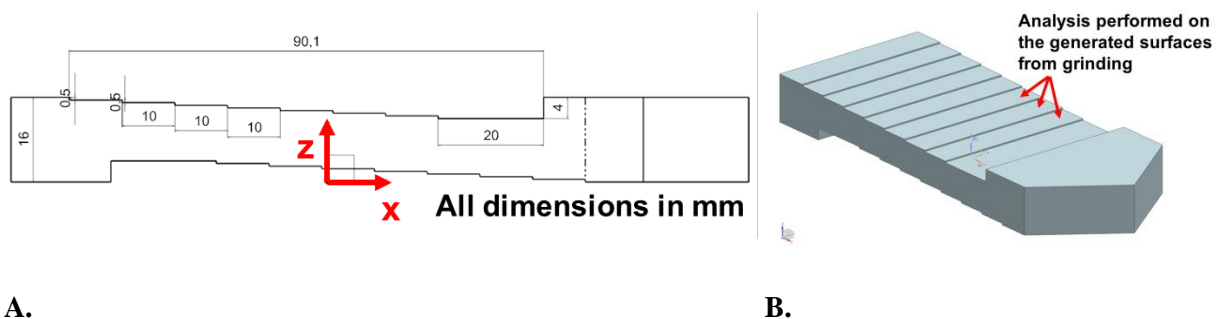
(A) CROSS SECTION OF CD GRINDING PLAN ON CMSX-4 SLABS (B) 3D ISOMETRIC VIEW OF COMPONENT AFTER GRINDING.
